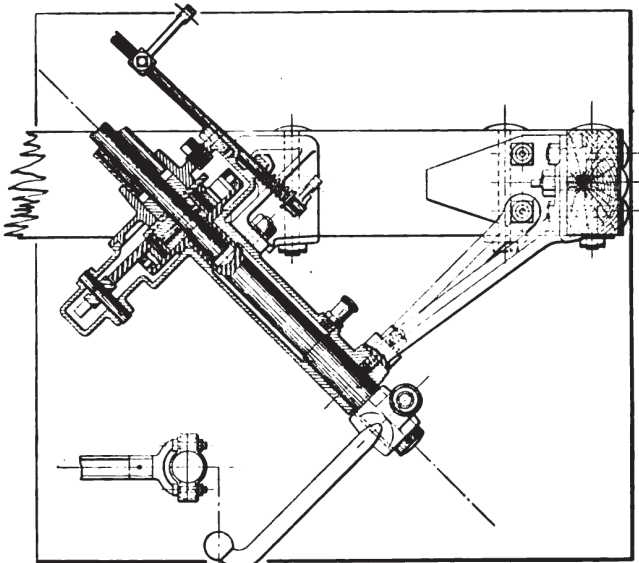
Steering gear, having a 6 : 1 ratio, long bearings, and strong support to frame
